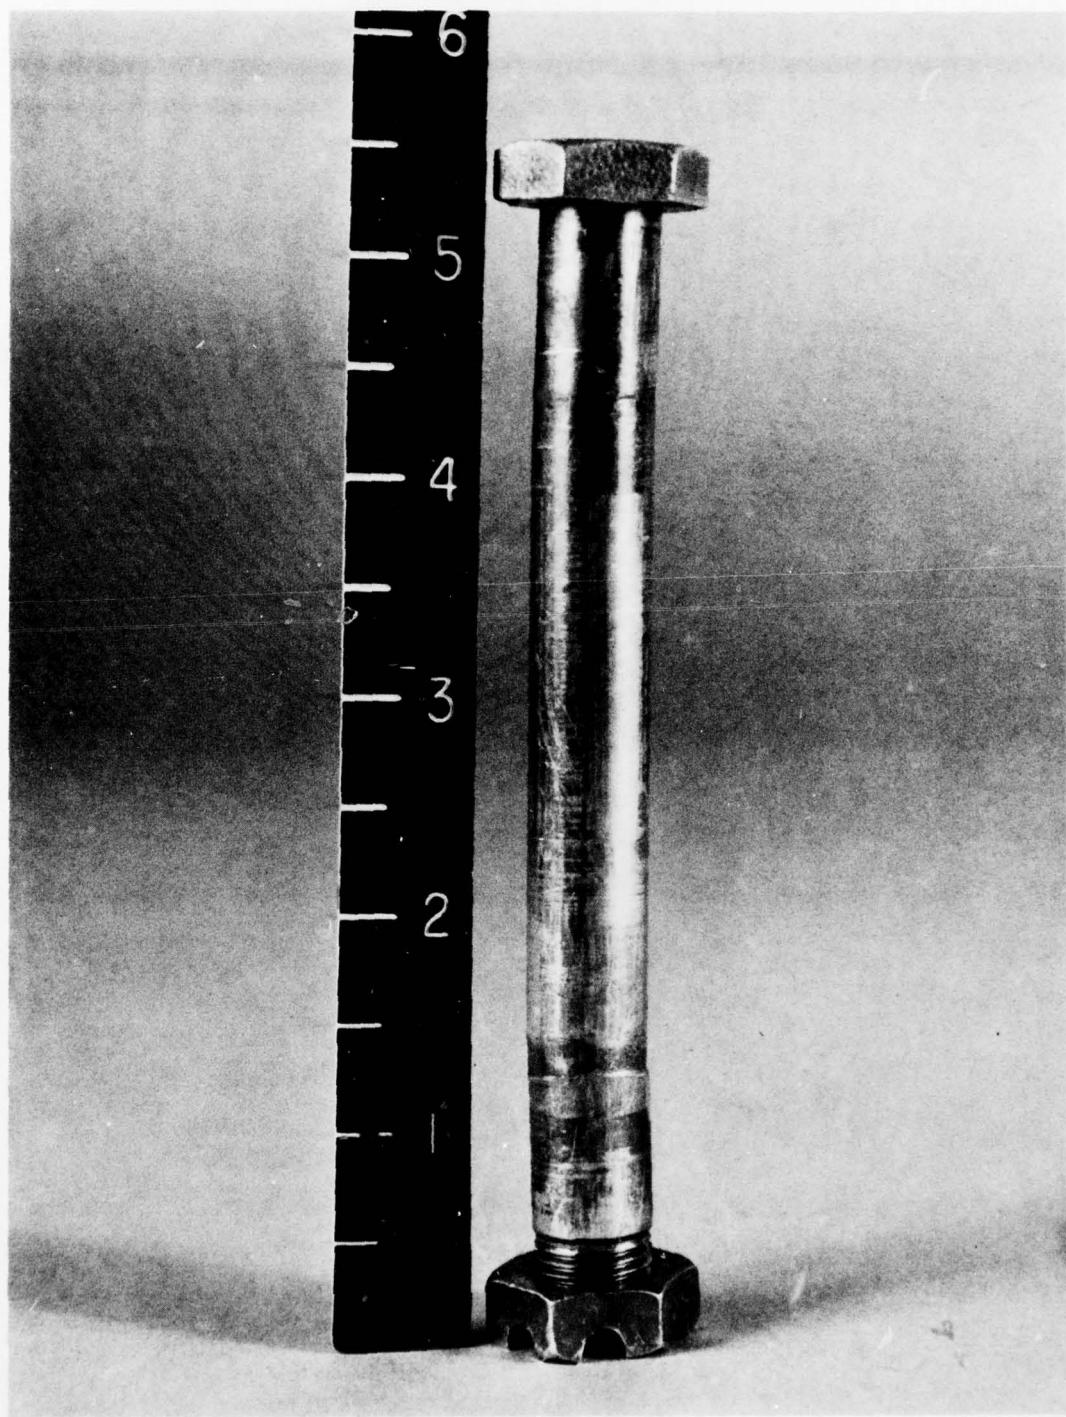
NAS 464P9-74 Bolt After Failing Load Test
